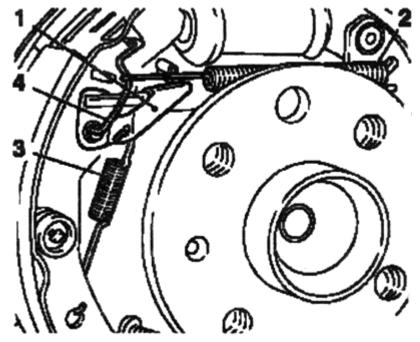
Setting adjusting ry-Chaga and springs:
